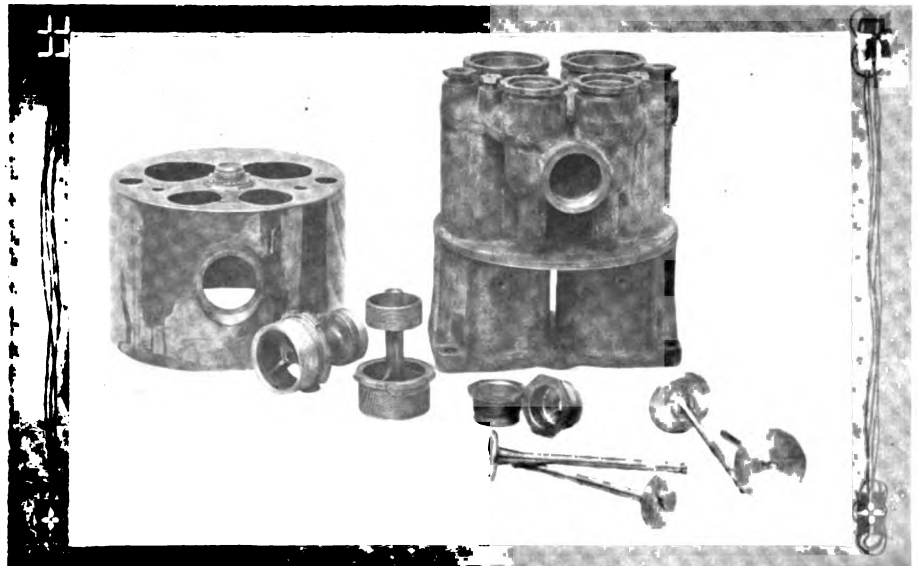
Showing the cylinder castings with water jacket taken off and valves remo-
